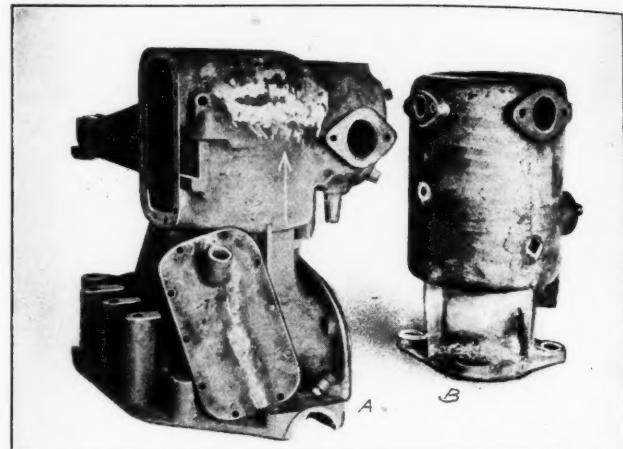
Cylinder A, (Fig. 1, B) repaired by inserting a Steel Piece, bent to Shape, and autogenously welded in Place.
